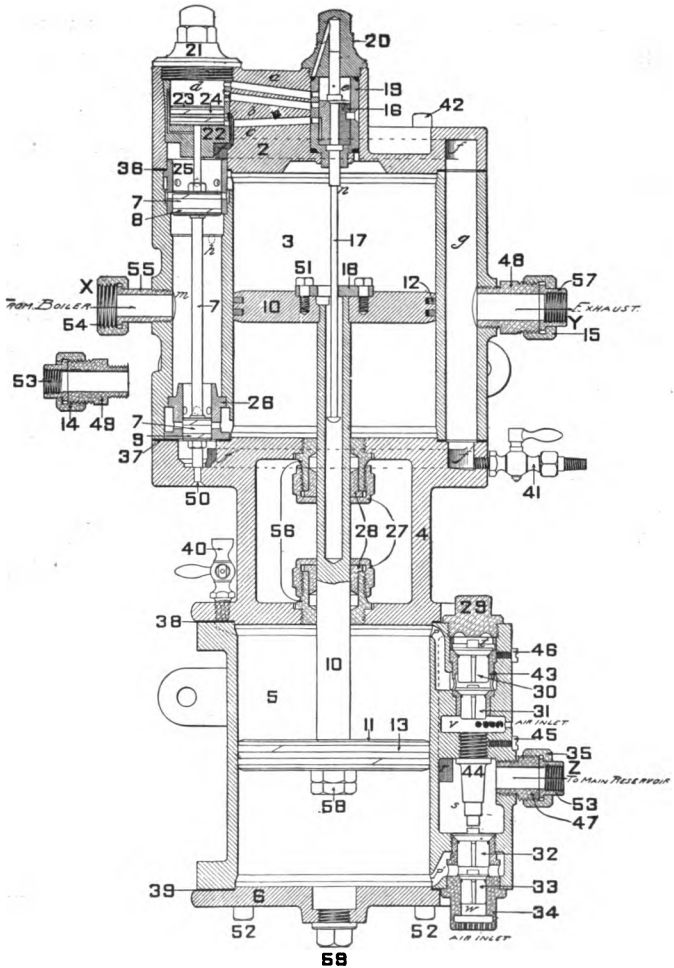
shows the Eight-inch Air Pump in its upward stroke. 10 is the steam piston and rod ; 11, the air piston ; and piston valves 7, piston 23, reversing slide valve 16, reversing rod 17 and reversing plate 18 constitute the valve gear of the pump. Valves 30 and 32 are the discharge air valves, and 33 and 31 are the receiving air valves.
